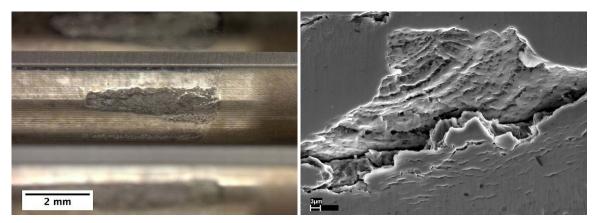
RAAF PC9/A 1st stage reduction gearbox sun gear failure.
